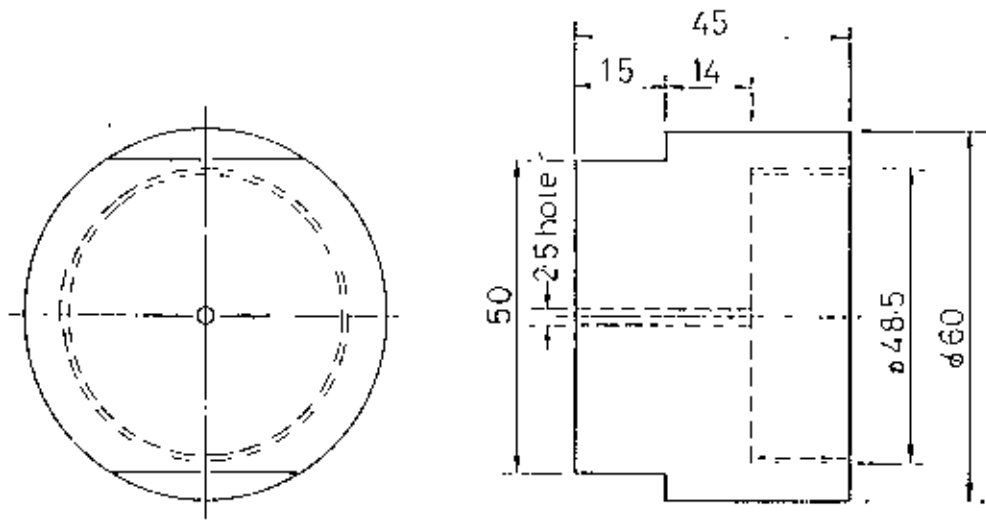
The total cross sectional view of the diffusion welding ring
